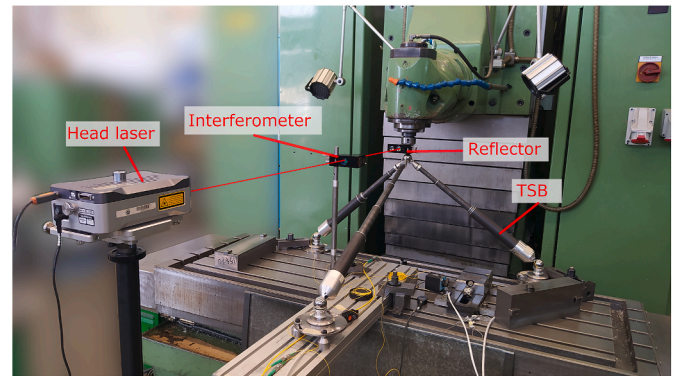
Laser interferometer Renishaw XL-80 and TSB testing set-up on ANAYAK VH1800 milling machine.
